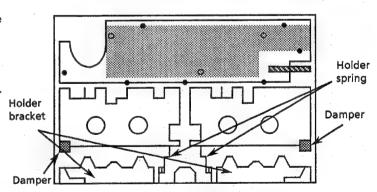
Rear view of the front panel assembly (After removing the mechanism assembly)
